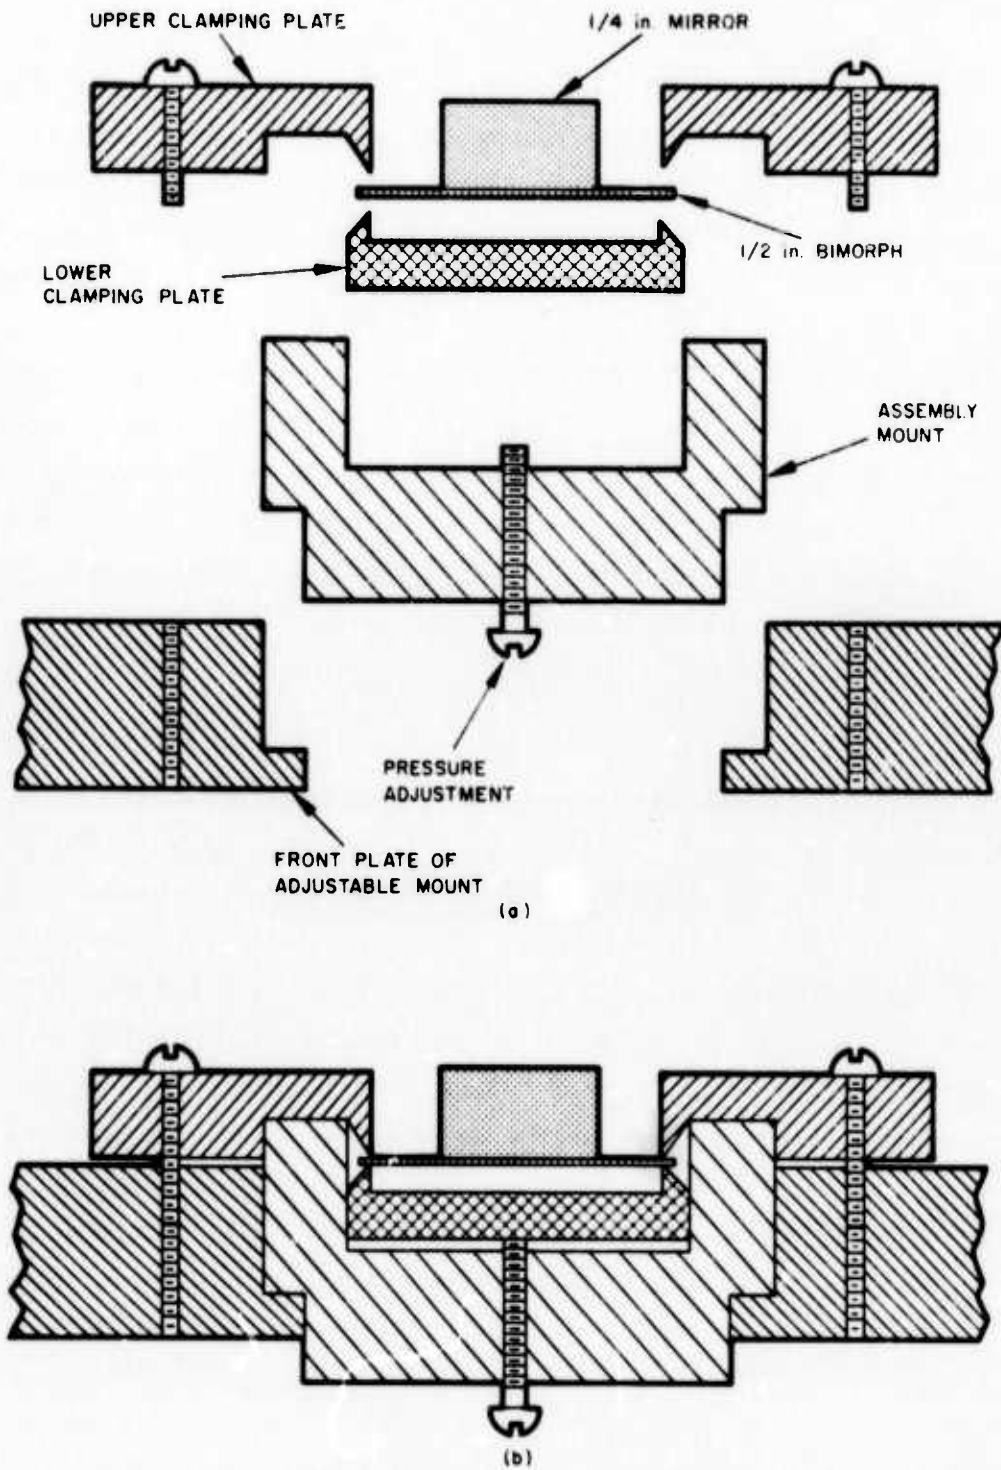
Assembly drawing for 1/2 in. diameter bimorph.
